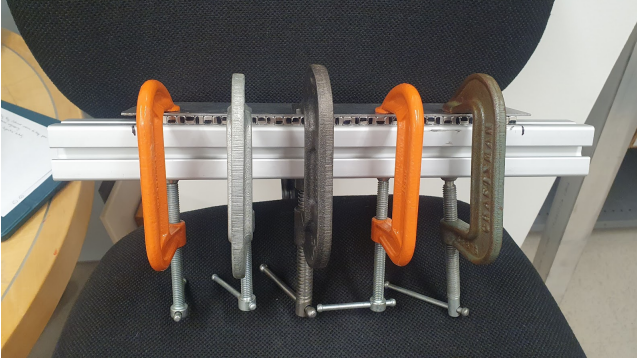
Magnets on a Steel Plate Clamped to Rail to let JB Weld Cure
